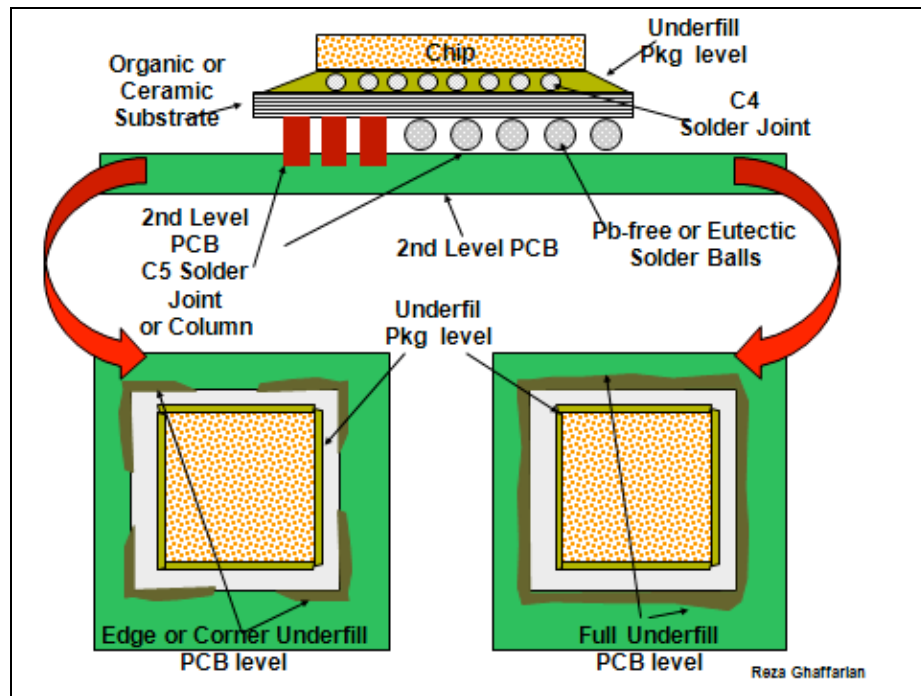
Underfill application at the package level under the flip-chip die and at the assembly level for high I/O flip-chip ball/column grid-array (FCBGA) packages.
